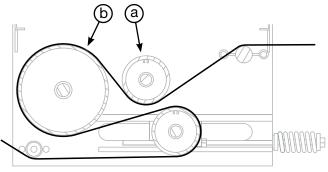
Drive box; 5" pinch roller (a), 10" drive roller (b)
